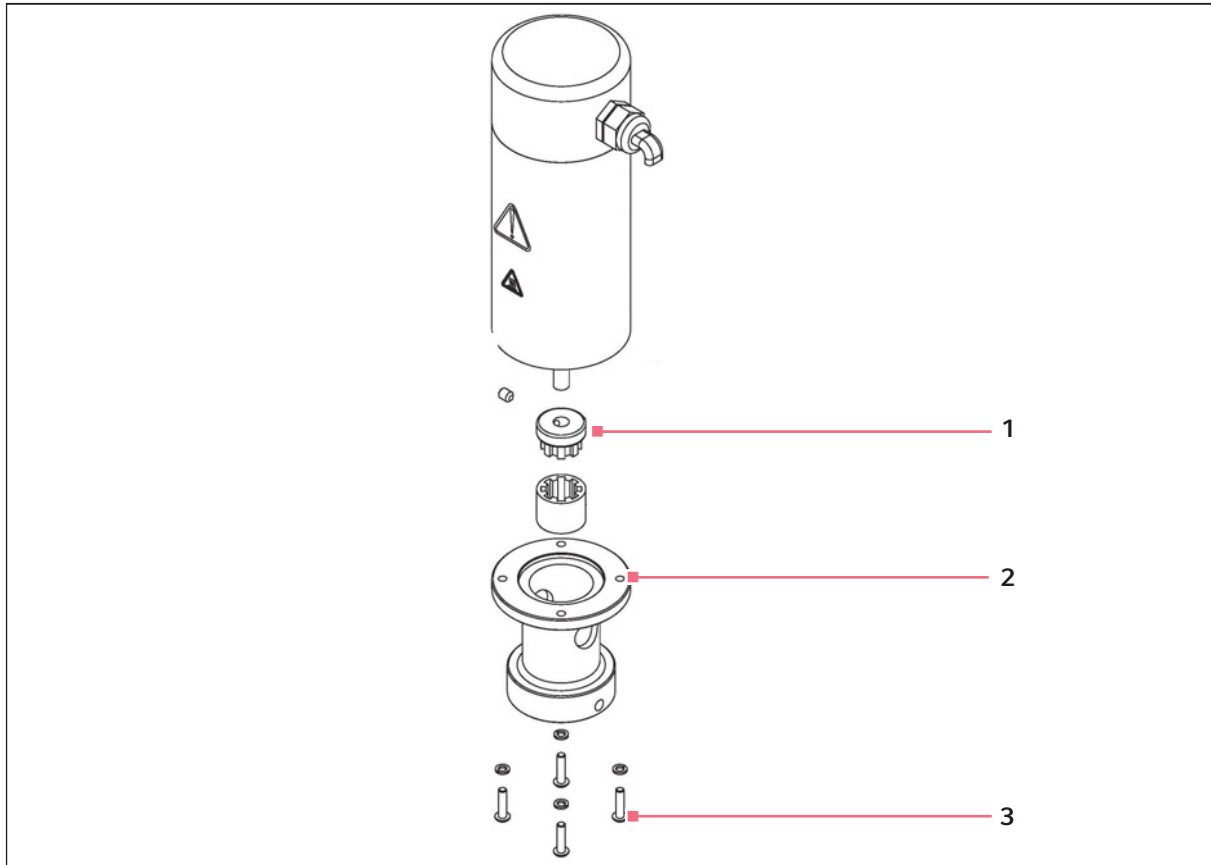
BioFlo 310 motor assembly (exploded view)
